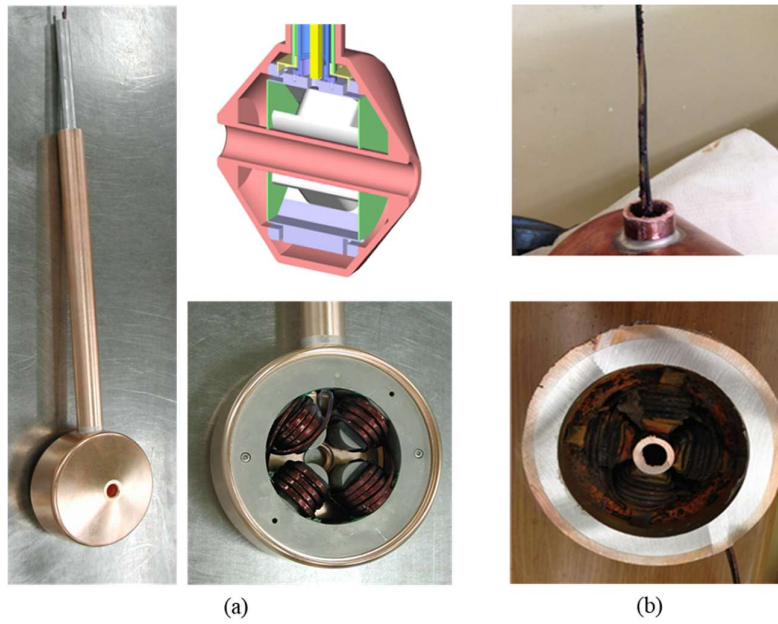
Drift tube for the 20-MeV DTL in KOMAC: (a) cross-sectional view of drawings and pictures of fresh DTQ before welding the tube and (b) photographs of old DTQ after failing and being cut.
